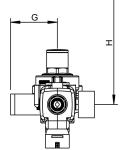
Dimensional drawing of GENO-therm® filling devices Basic, Komfort
